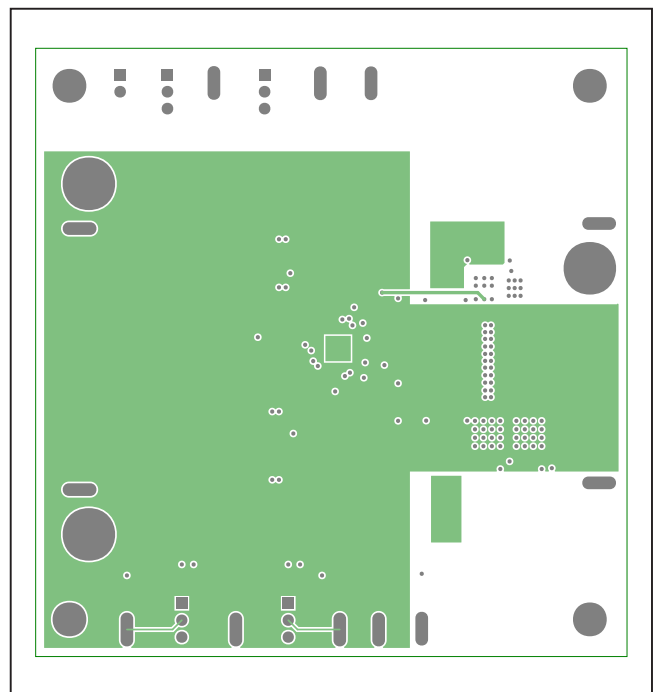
MAX17548 EV Kit PCB Layout—Inner Layer 2
